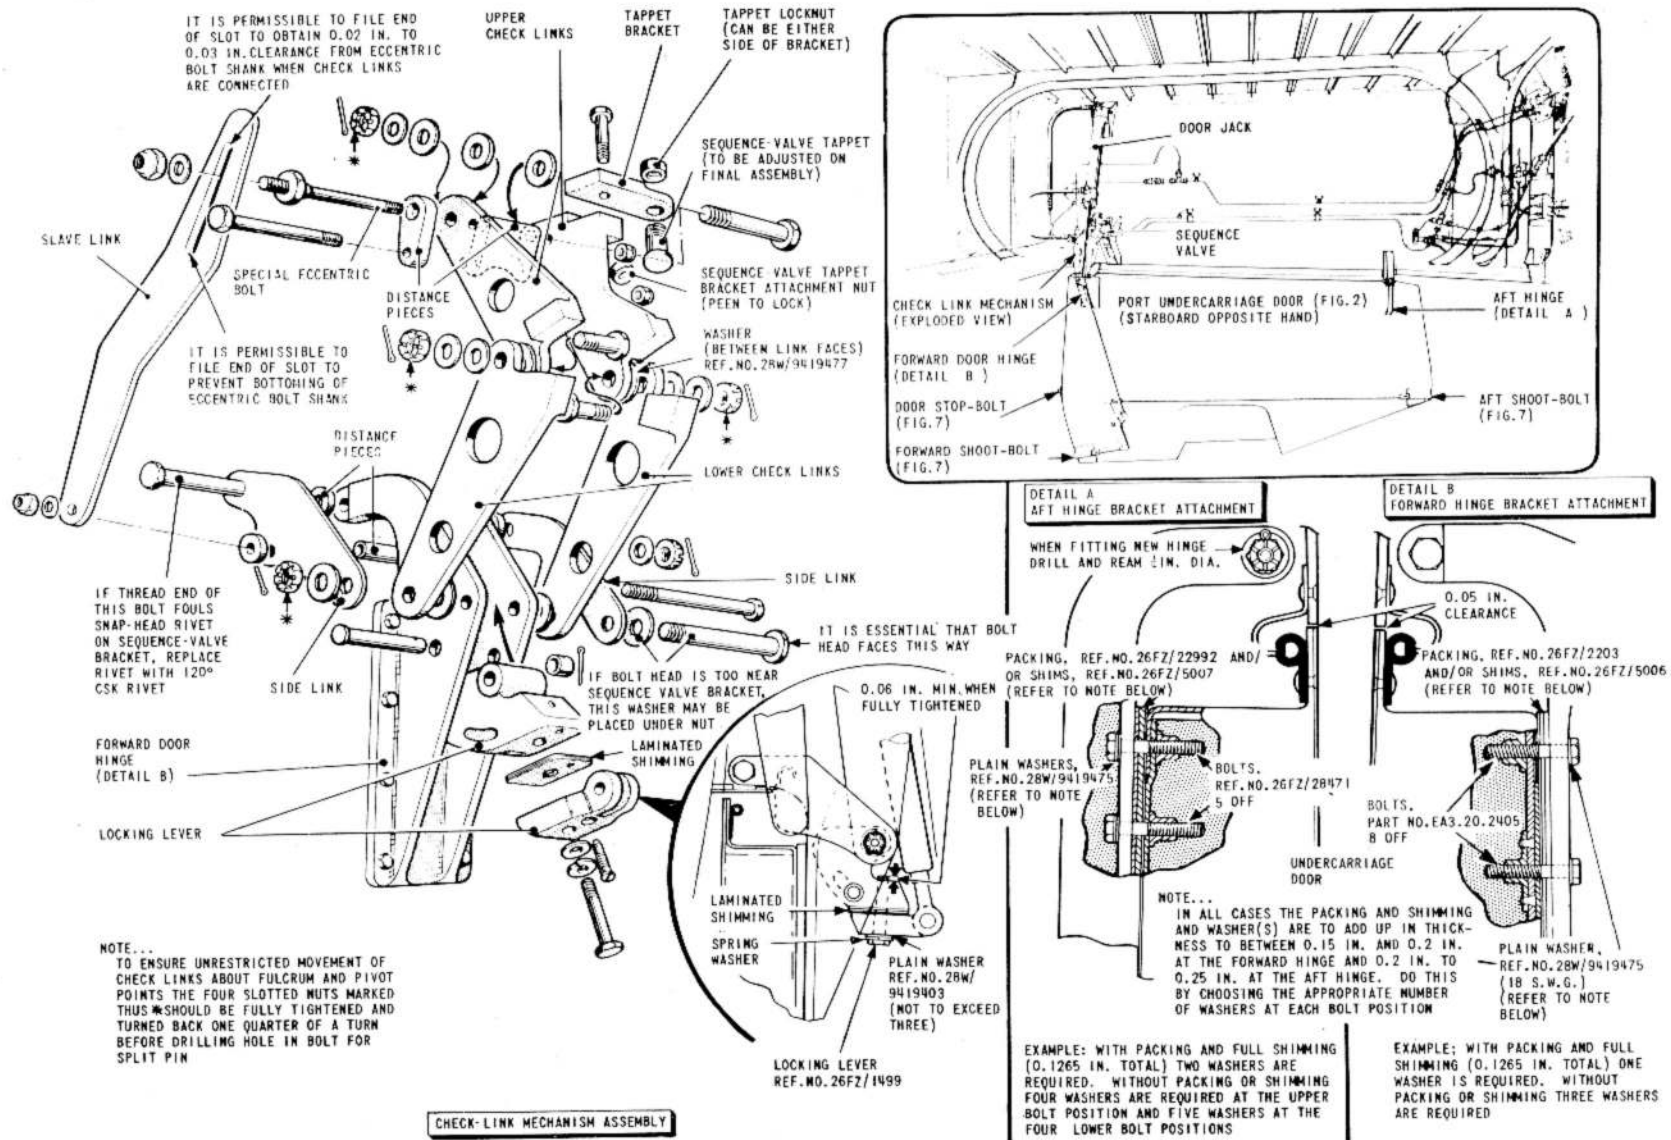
CHECK - LINK MECHANISM AND DOOR-REMOVAL AND ASSEMBLY
